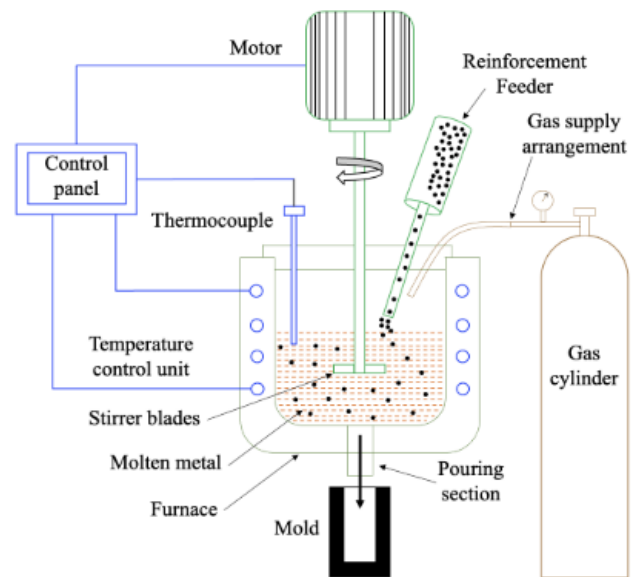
Stir casting setup in-situ (Morsiya & Pandya, 2023)
